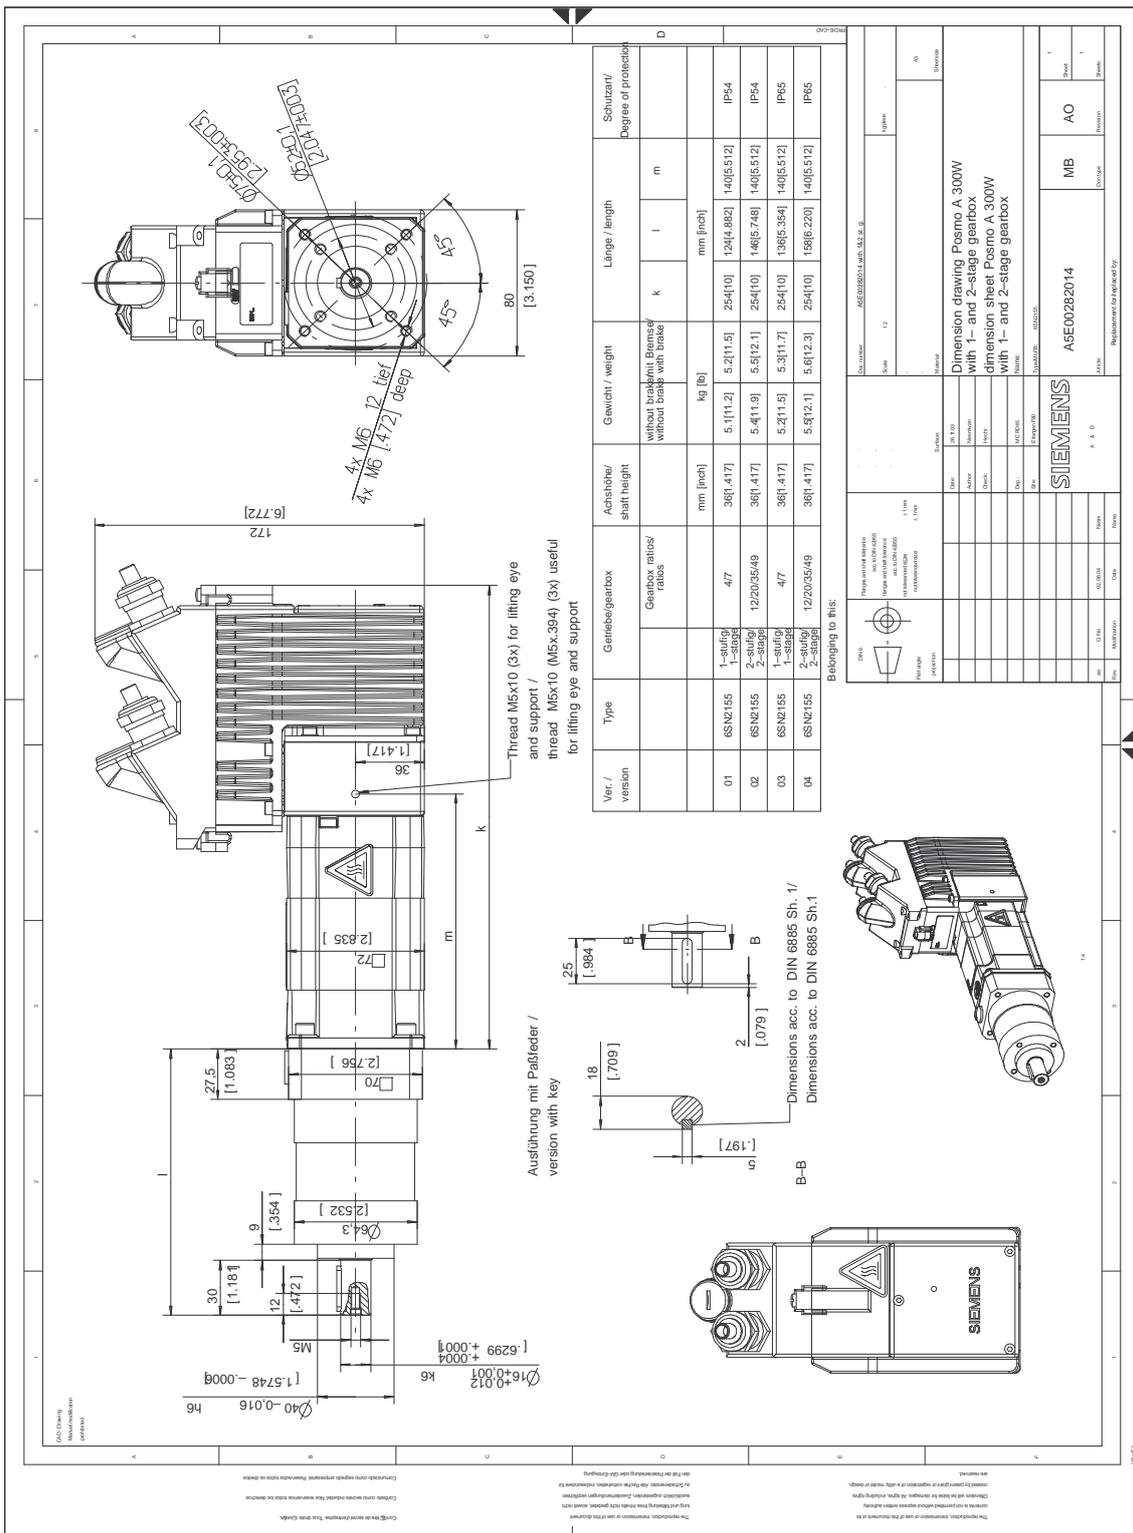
Dimension drawing: SIMODRIVE POSMO A – 300W with planetary gearbox (1–stage, 2–stage)
